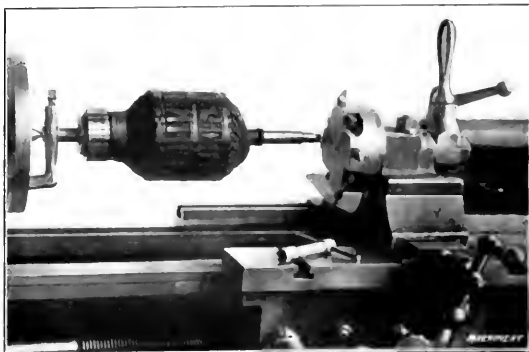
Stevens Turret Toolpost in Operation on the Lathe
